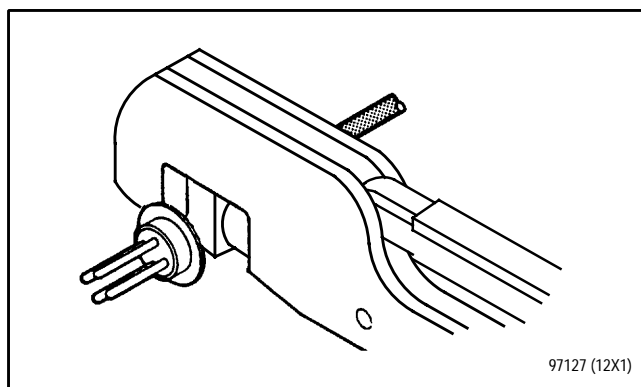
Installation of Lead Wires Into Insulator Assembly (Sheet 5 of 6)
